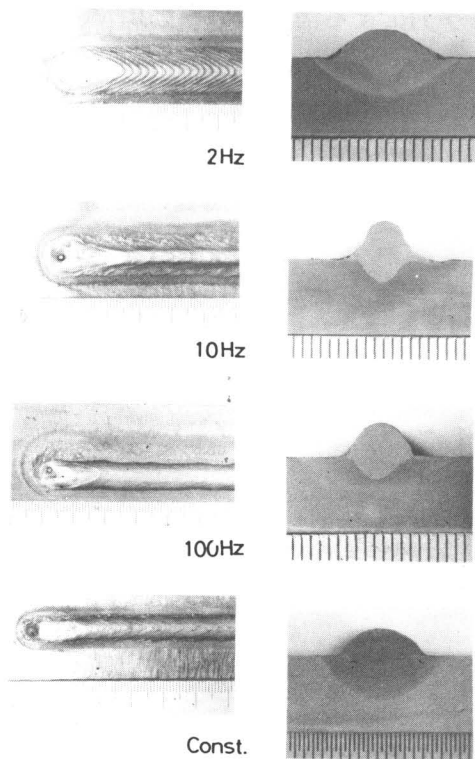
Typical appearances of weld bead in MAG welding with pulsed and constant current.
